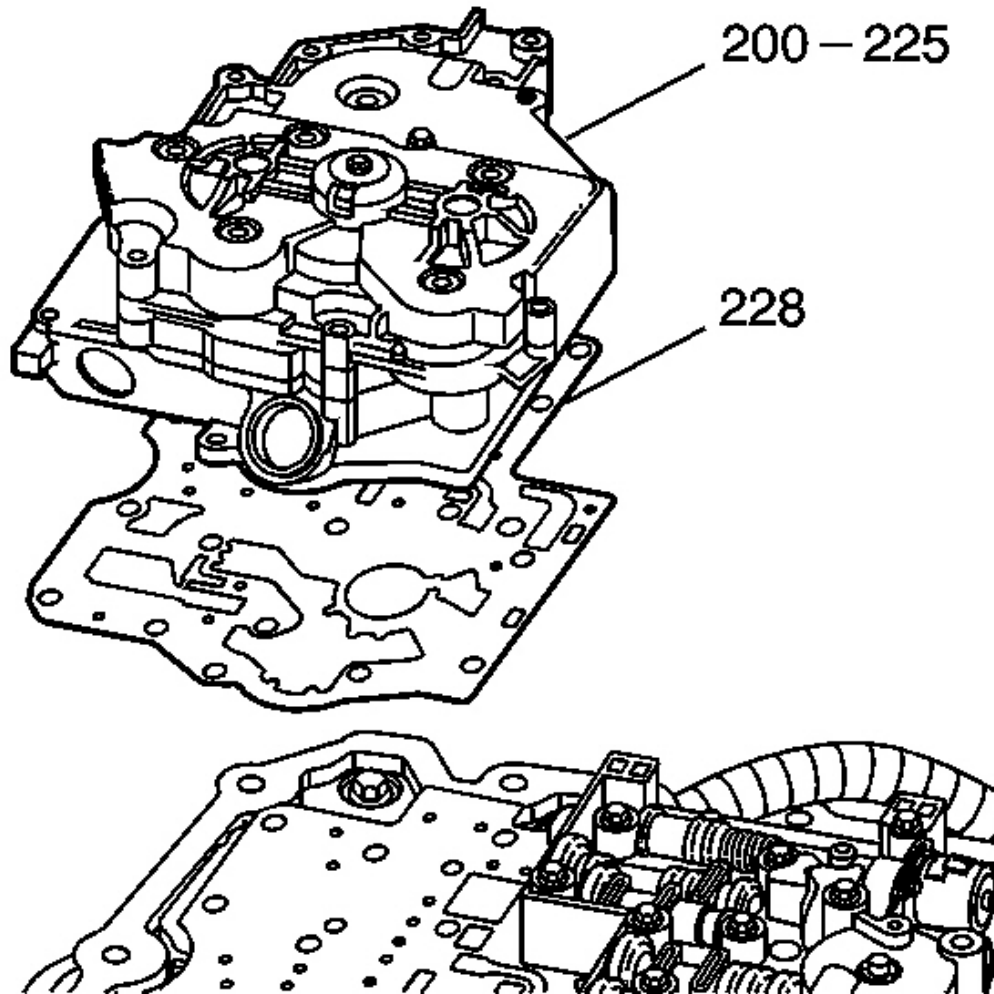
View Of Scavenge, Primary And Secondary Pump Assemblies
